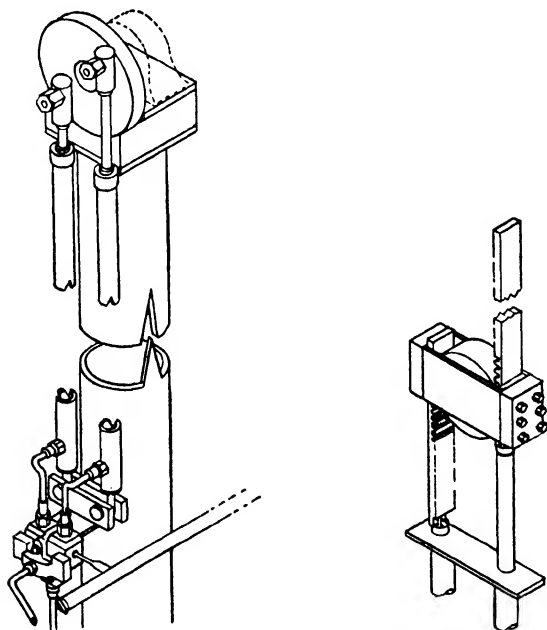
Hydraulic Mechanism for Picture-frame Fixture.
